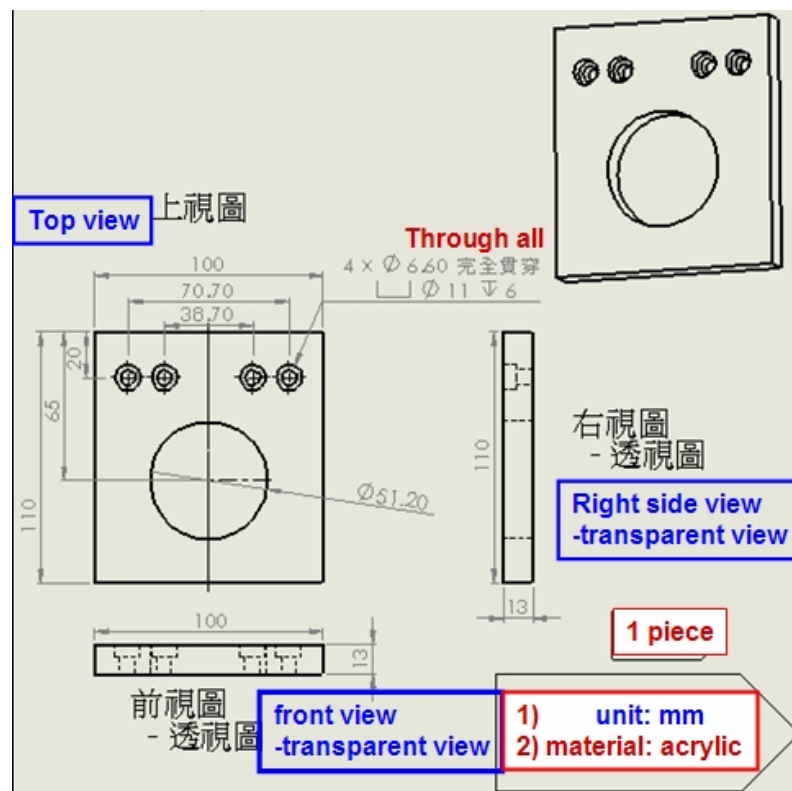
Engineering drawing of the single-hole work cylinder holder.
